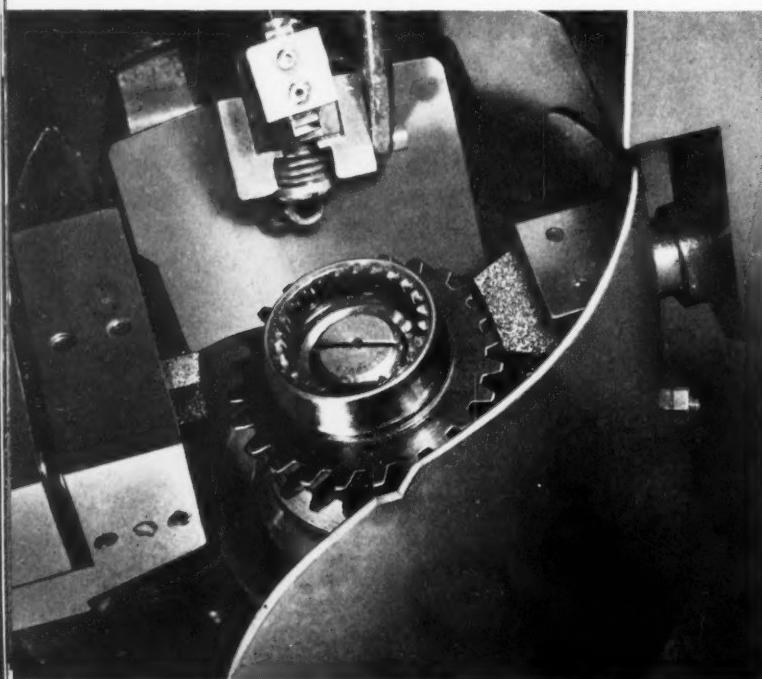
Equipment Designed for an External Honing Operation on the Conical Surface of Clutch and Second-speed Transmission Gears
